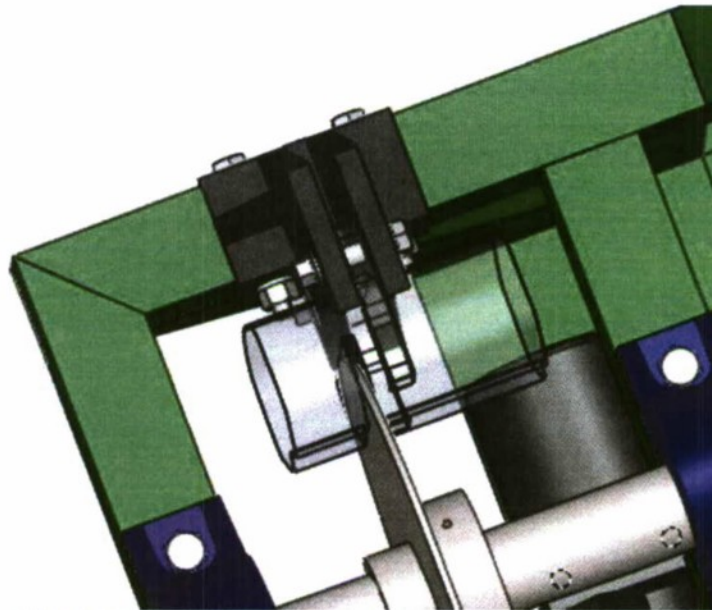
Brake caliper mount that will allow the brake caliper to mount to the frame.
